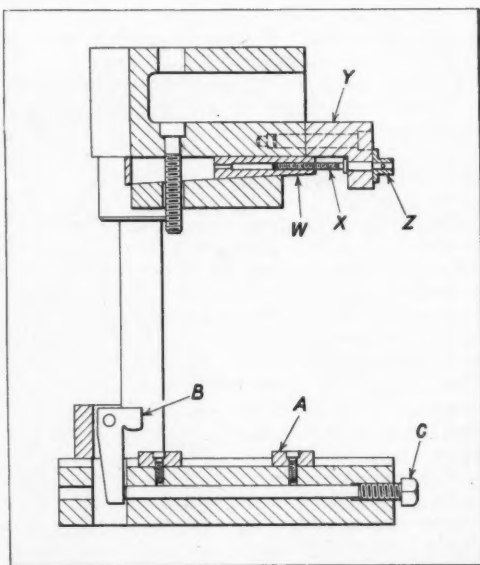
Sectional view showing the wedge adjustment for the upper assemblies of certain tool units, also the rear clamping arrangement for lower tool assemblies
